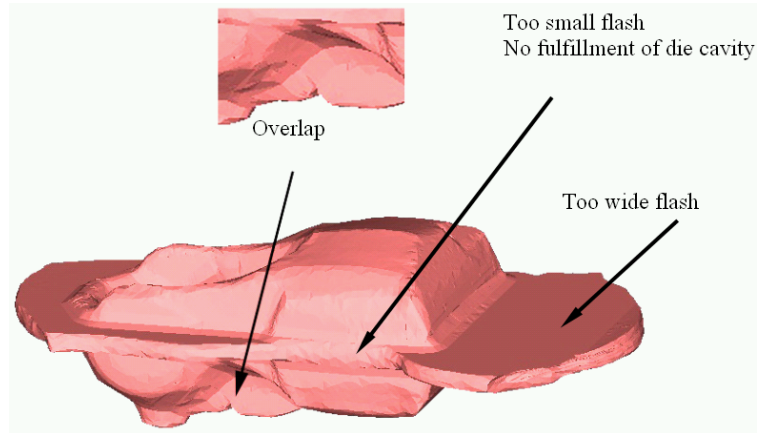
View of forged shape after initial forging. Overlap and incorrect form of flash are pointed out
